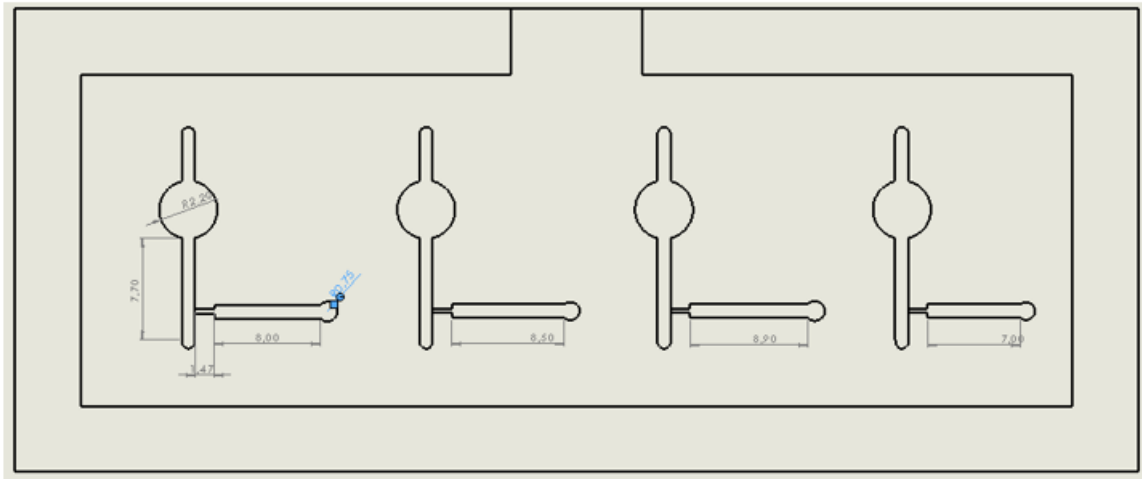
Drawing in SolidWorks of Master Mould containing trigger valve structures
